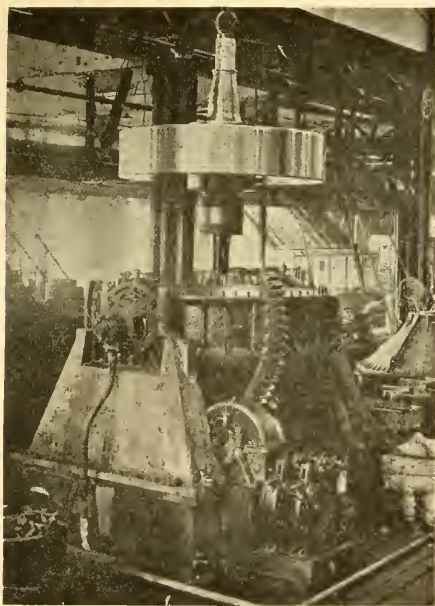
ROTOR WITH SHAFT STUBS BOLTED IN PLACE
